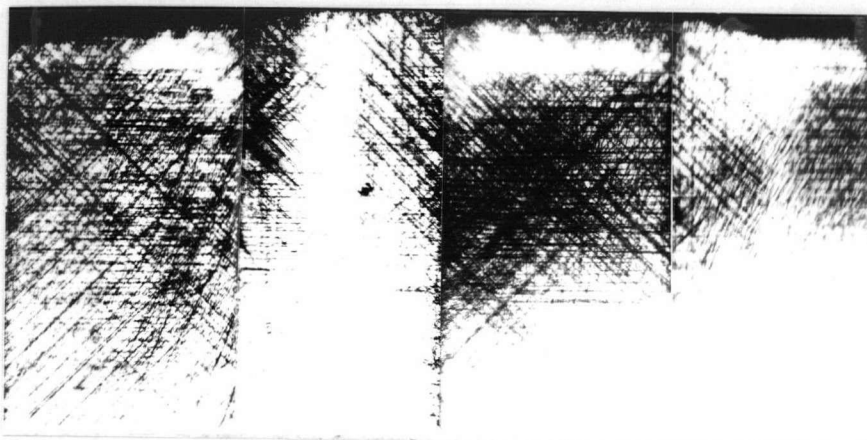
Faces of broken rod near fracture end. Etched. (x15).
